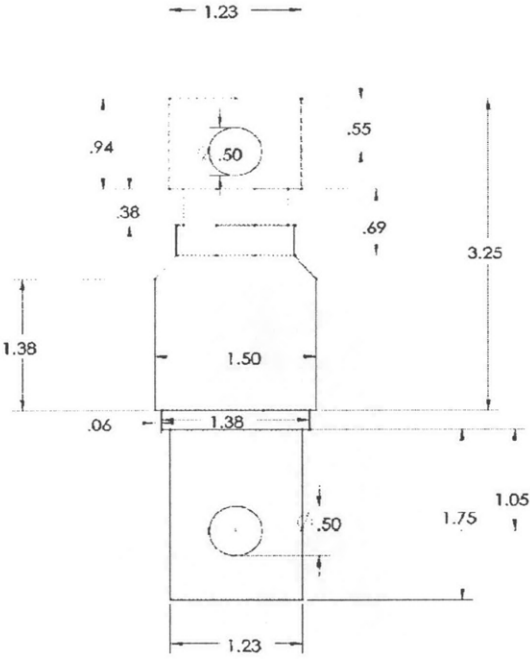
Schematic drawing of the tensile test specimen for the 1.5" EMW joint.
